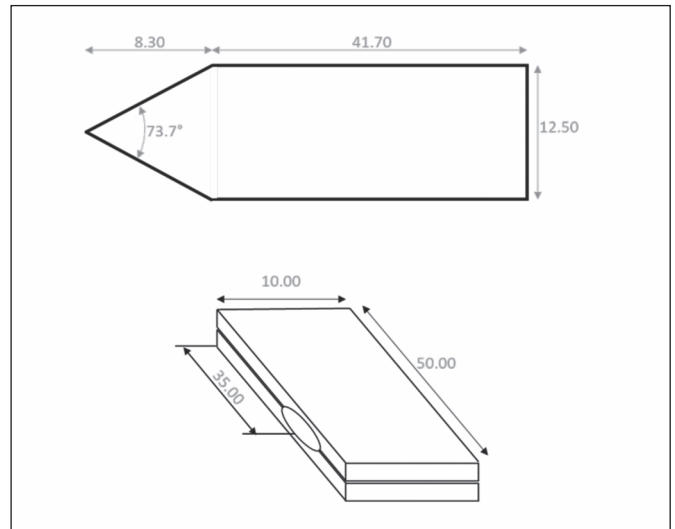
Geometry of the wedge and sample used for single-sided wedge testing (dimensions in mm).
